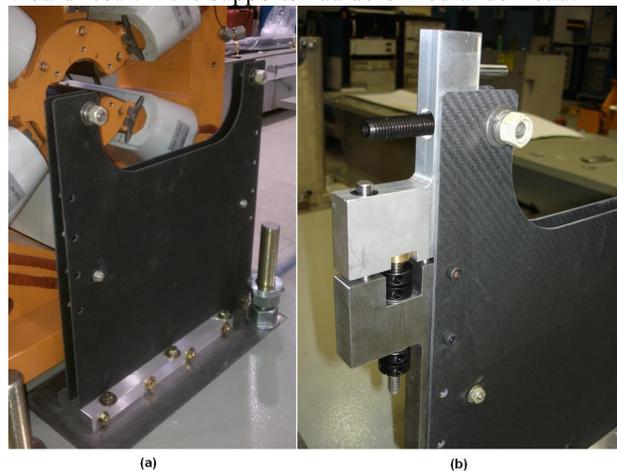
a) Production chamber support. b) Chamber adjustment fixture.
